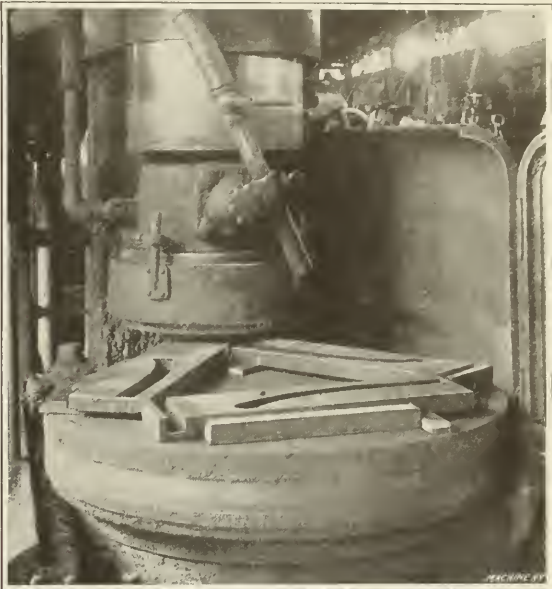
Method of supporting and holding Cast-iron Guides on Magnetic Chuck made by Blanchard Machine Co., Cambridge, Mass.
